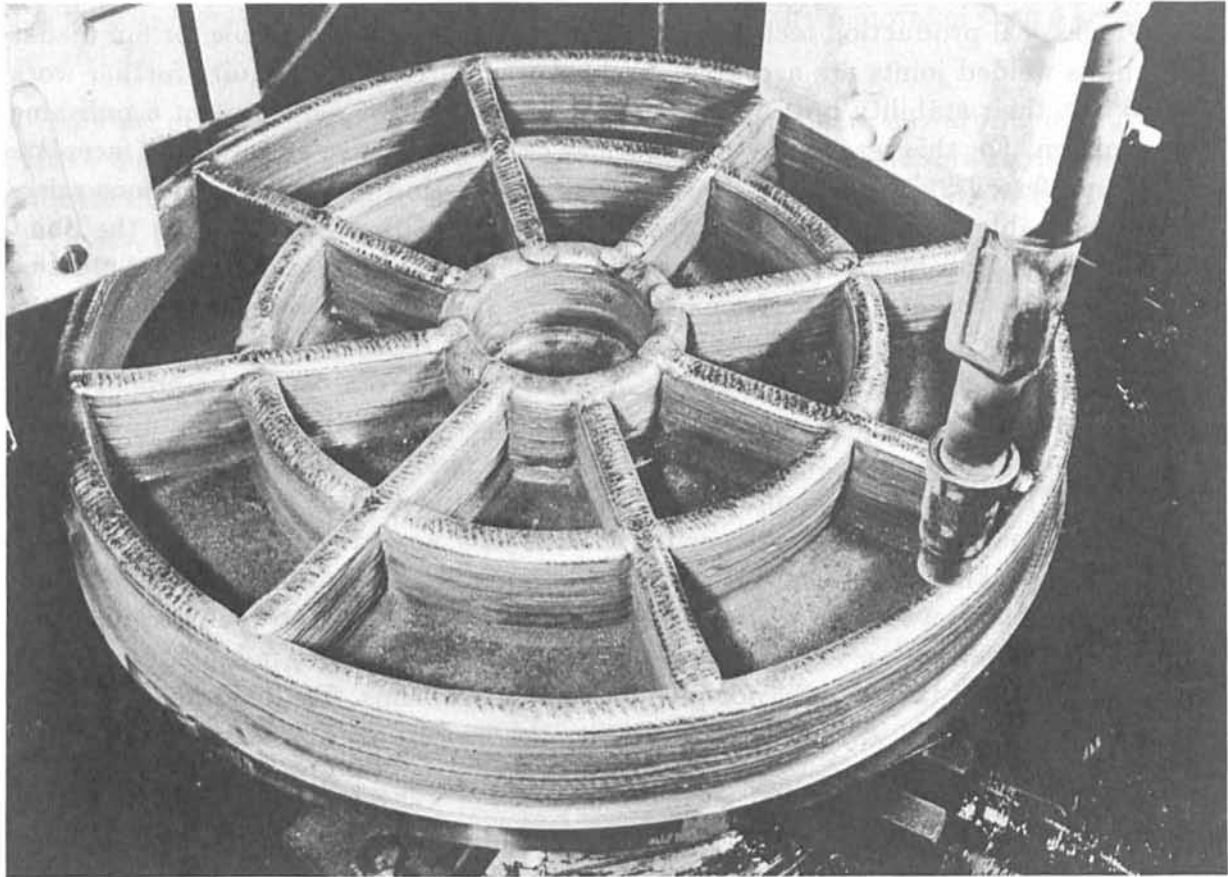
Structured steel mirror being produced by built-up welding.
